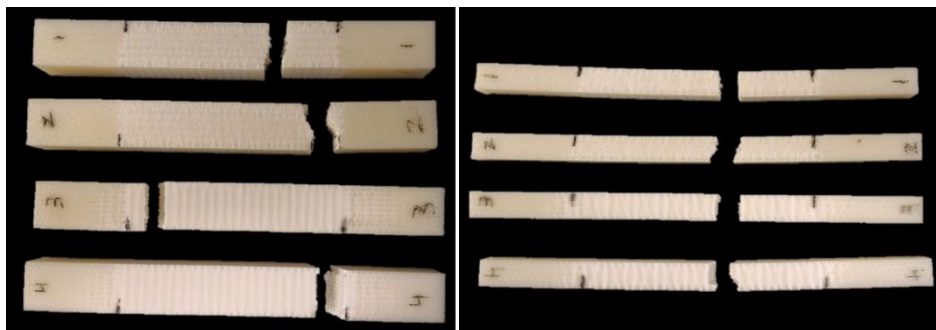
Grip test parts showing fracture planes closer to grip edges in large pieces (left) and more central in smaller pieces (right)
